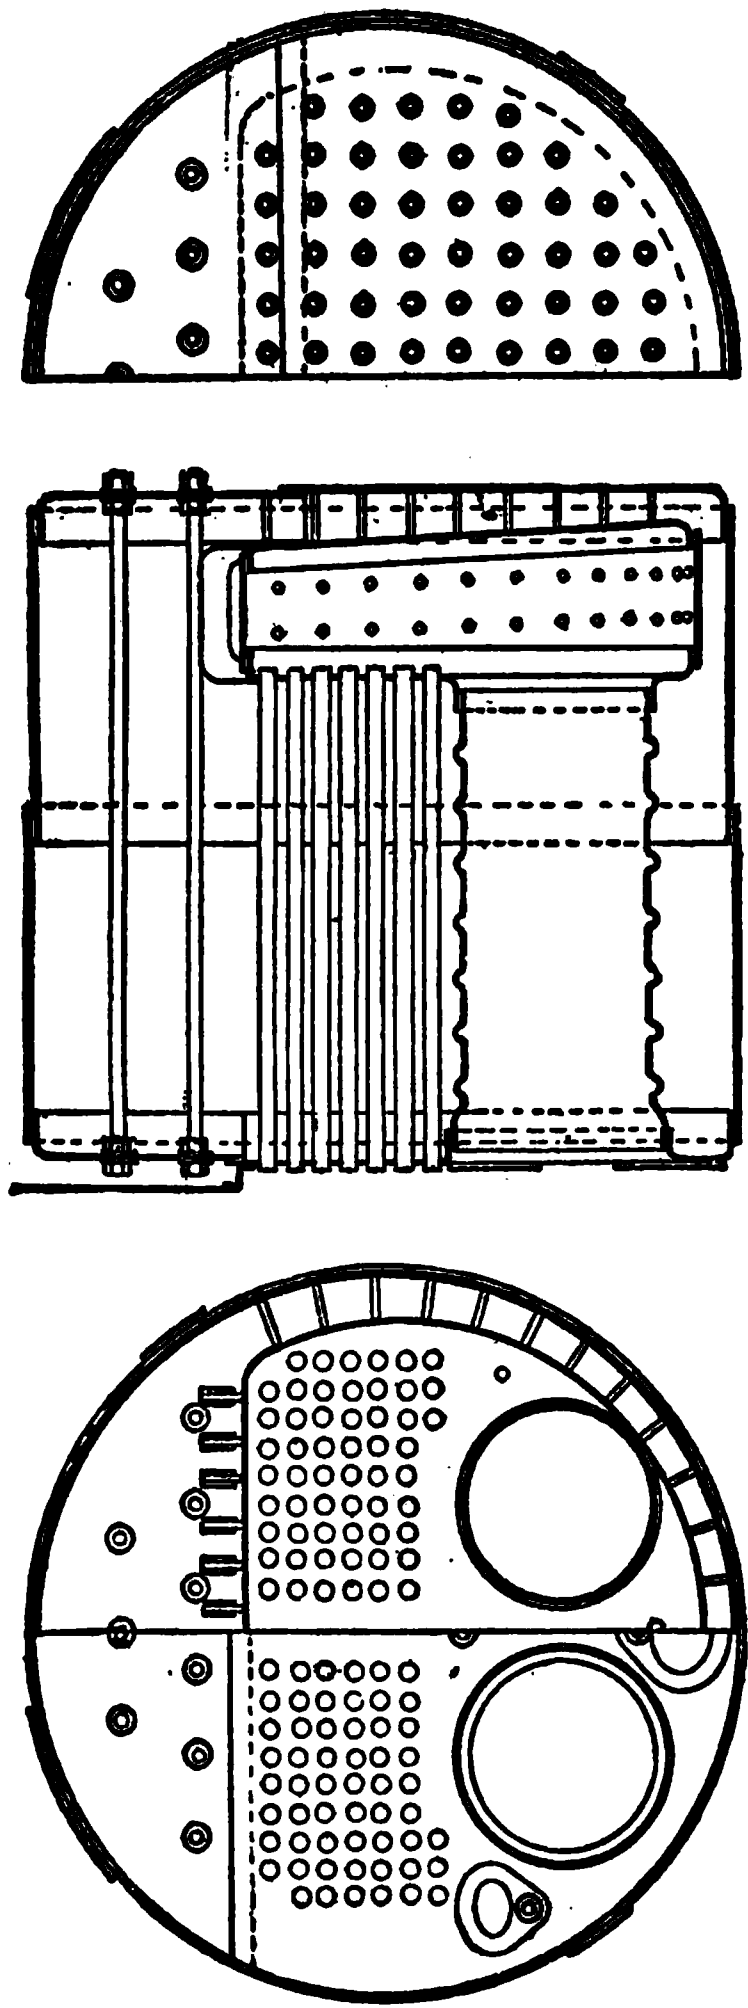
SINGLE-ENDED CYLINDRICAL BOILER (PURVES FURNACES).
